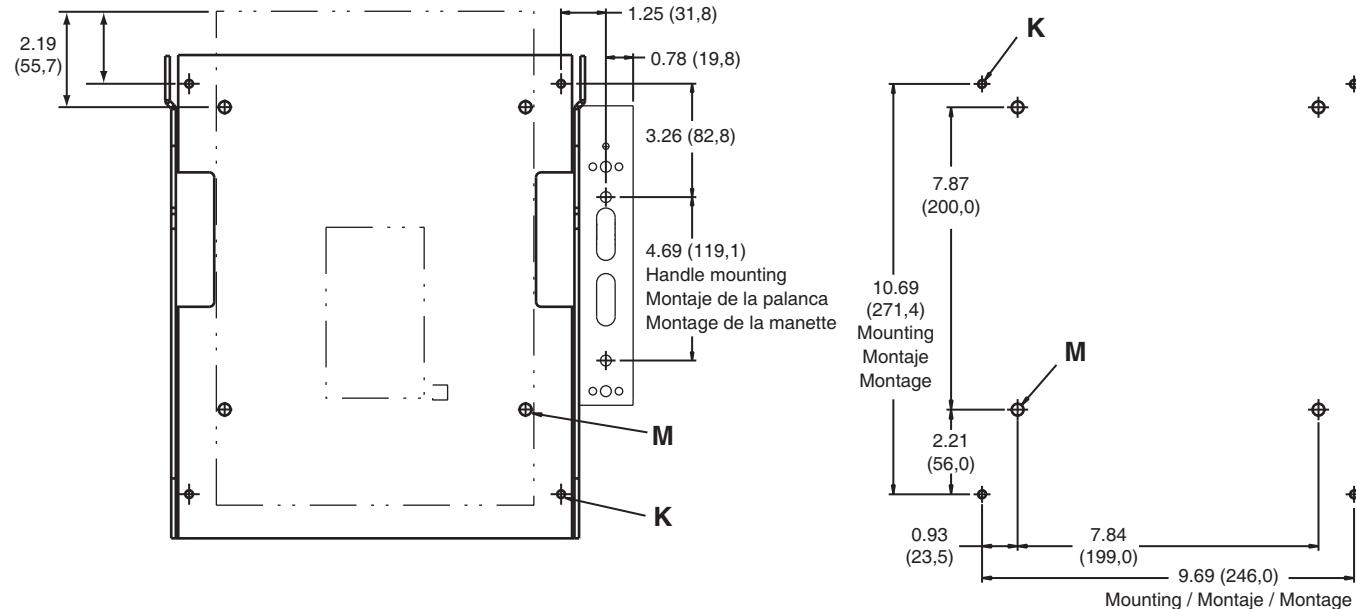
Panel Drilling Dimensions / Dimensiones de las perforaciones del tablero / Dimensions de perçage du panneau
